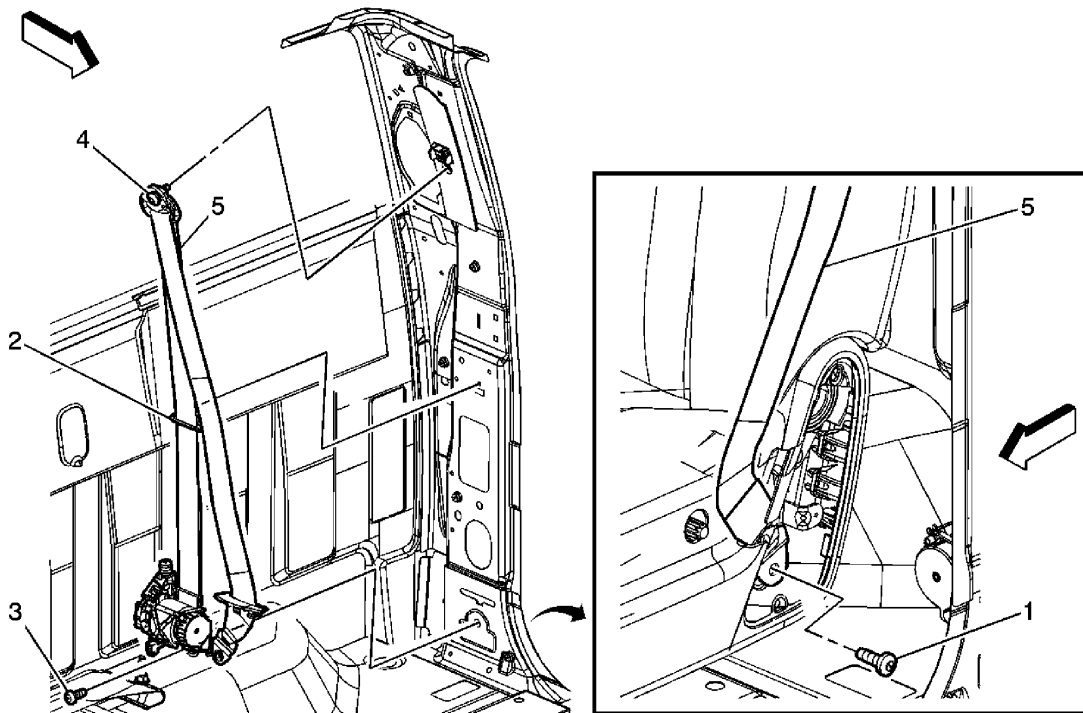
Seat Belt Retractor Pretensioner Replacement - Front (Regular Cab)
